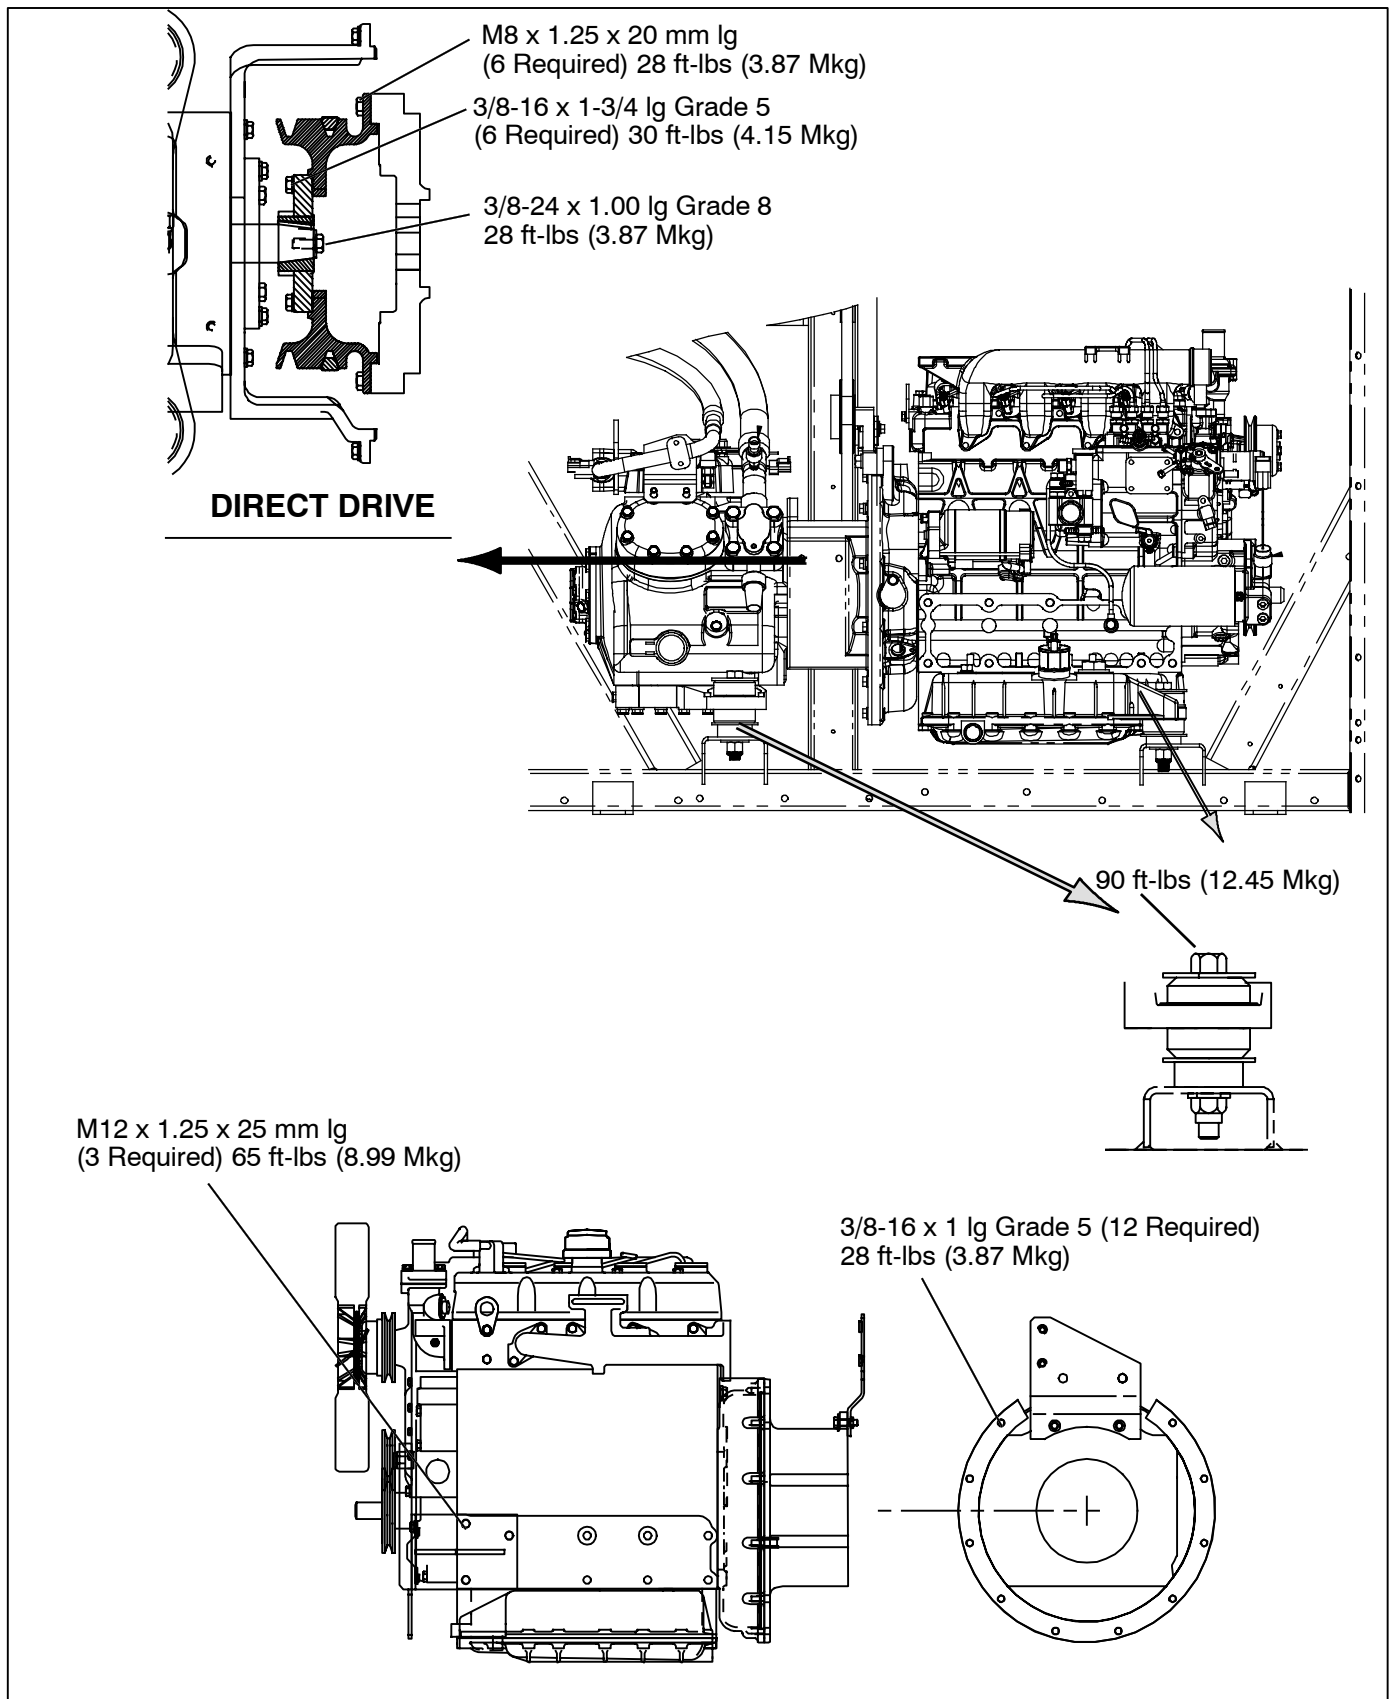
Unidrive Torque Requirements - Electronic Speed Control Engine
